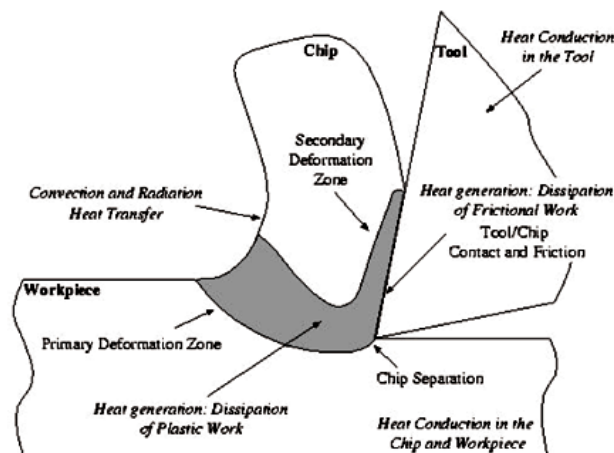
Deformation zones during chip formation for orthogonal machining [22].
